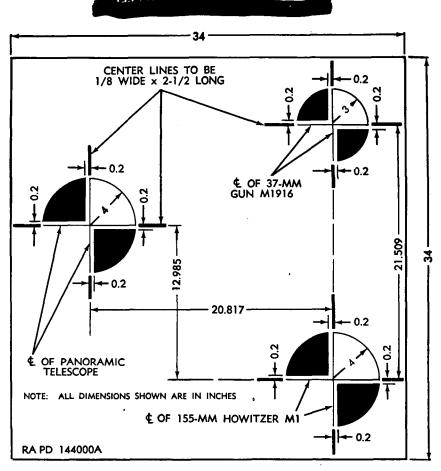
Testing target for boresighting 155-mm howitzer M1 and howitzer mount M14 mounted on motor carriage M41.
